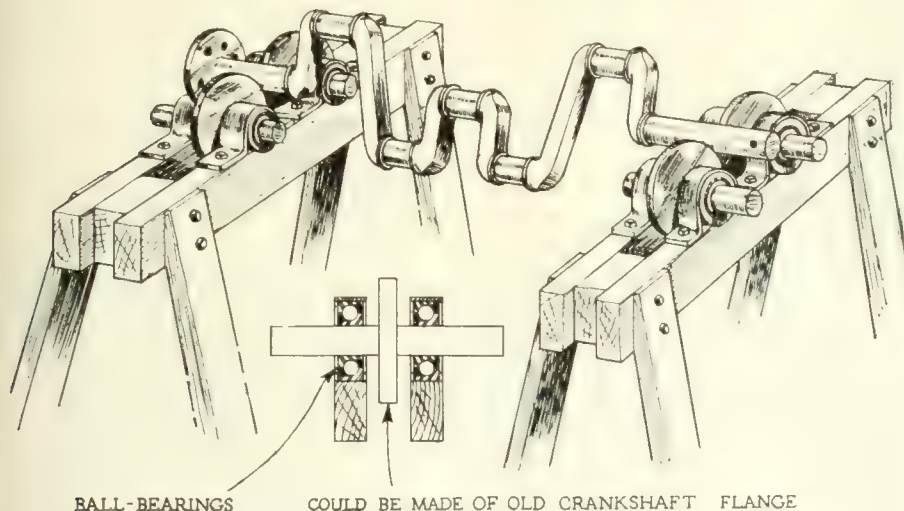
A crankshaft balancing device which consists of the flanged ends of old crankshafts revolving on roller bearings. The horses are of wood
